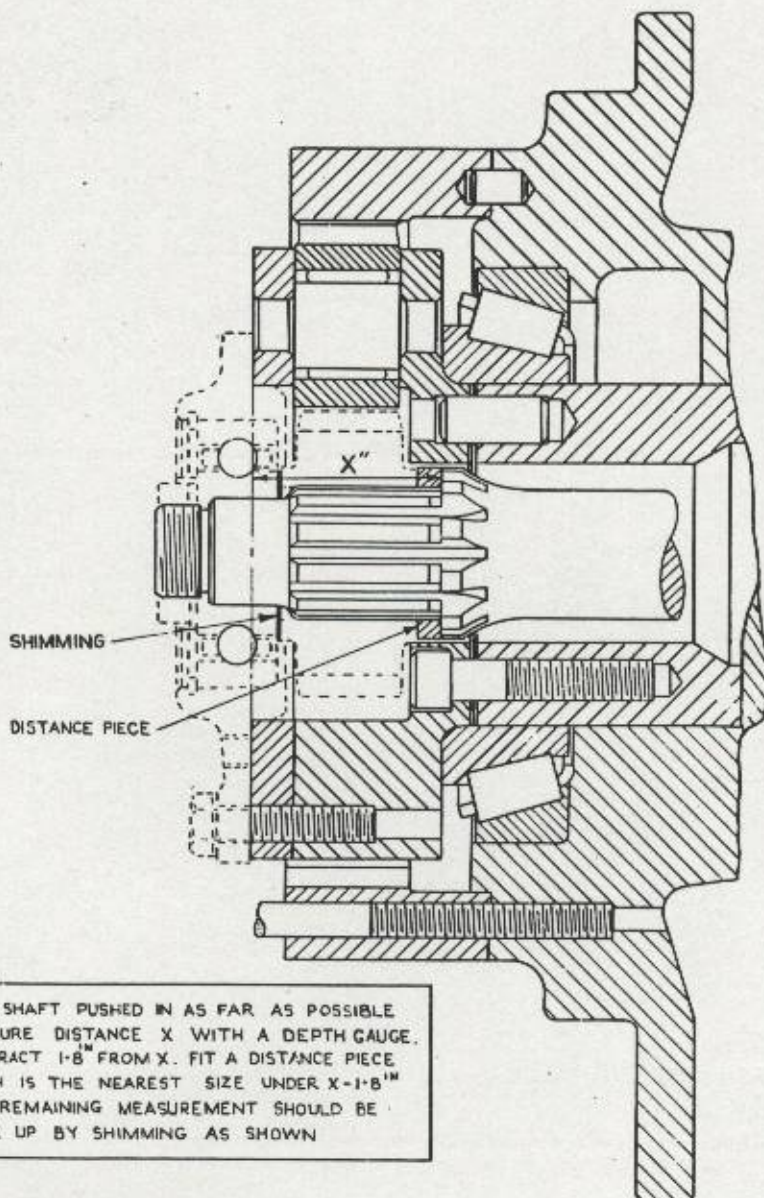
HUB REDUCTION - FINAL DRIVE ADJUSTMENTS
